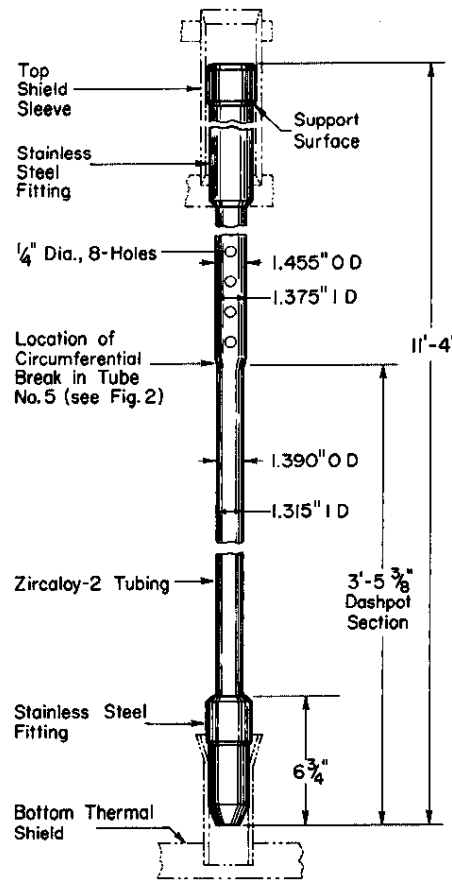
HWCTR SAFETY ROD GUIDE TUBE
